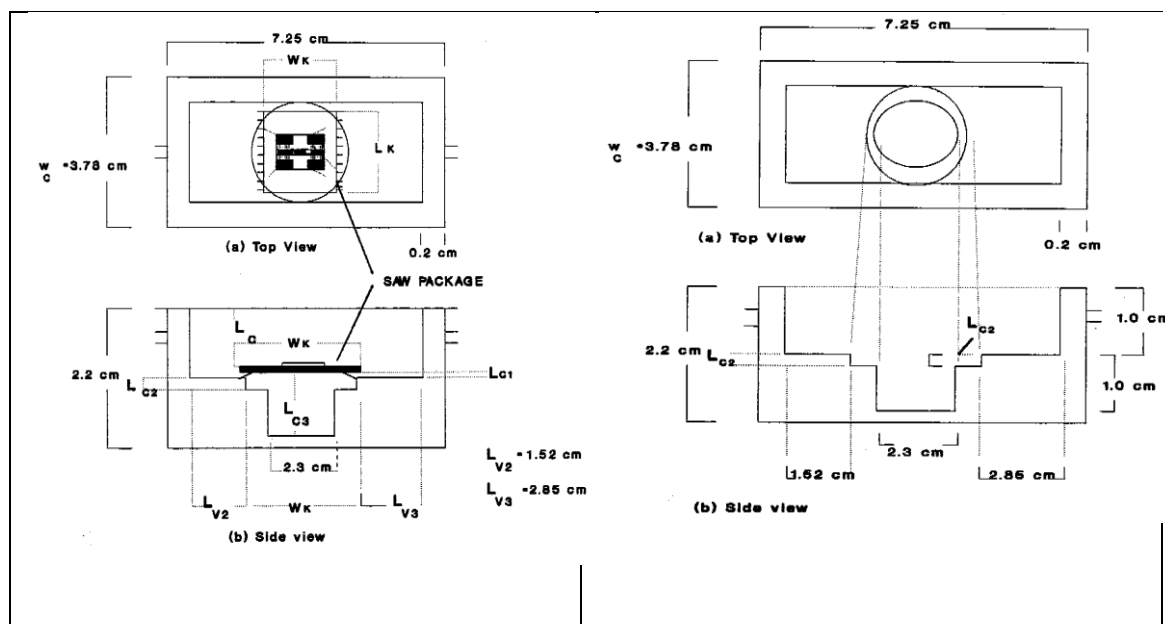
Cross-sectional and side views of the SAW package arrangement in the flow cell.
